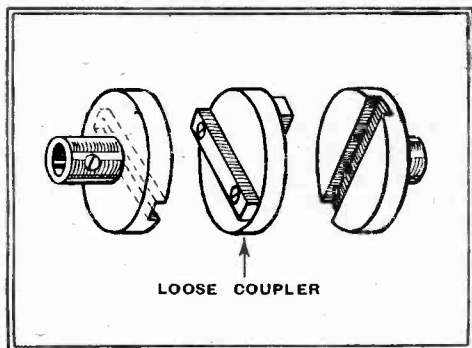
Coupling for parallel spindles misaligned, with parts dismounted to show action. The dogs must be a good sliding fit in the guides.
